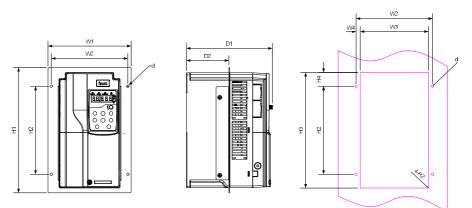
380V 11- 22kW VFD flange mounting diagram
